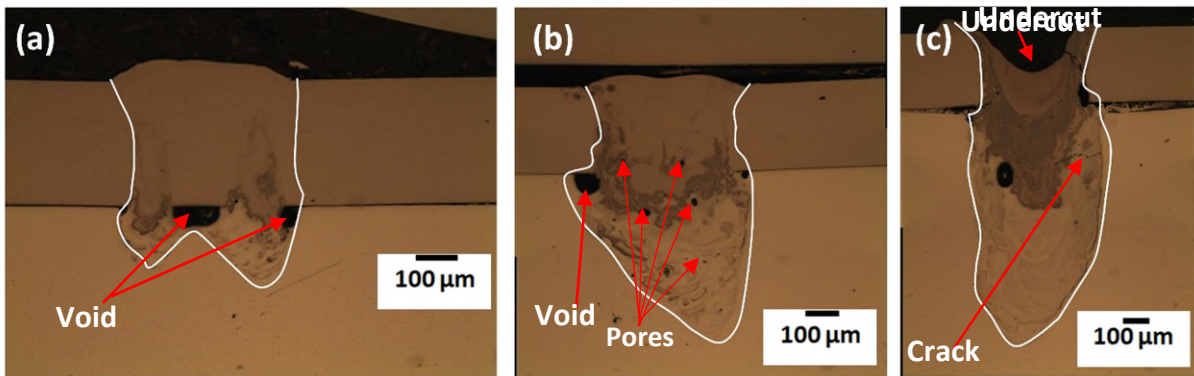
Macro view of the laser welded Ni tab to Al busbar at (a) under-weld, P= 450 W (b) good-weld, P= 900 W and (c) over-weld, P= 1125 W
